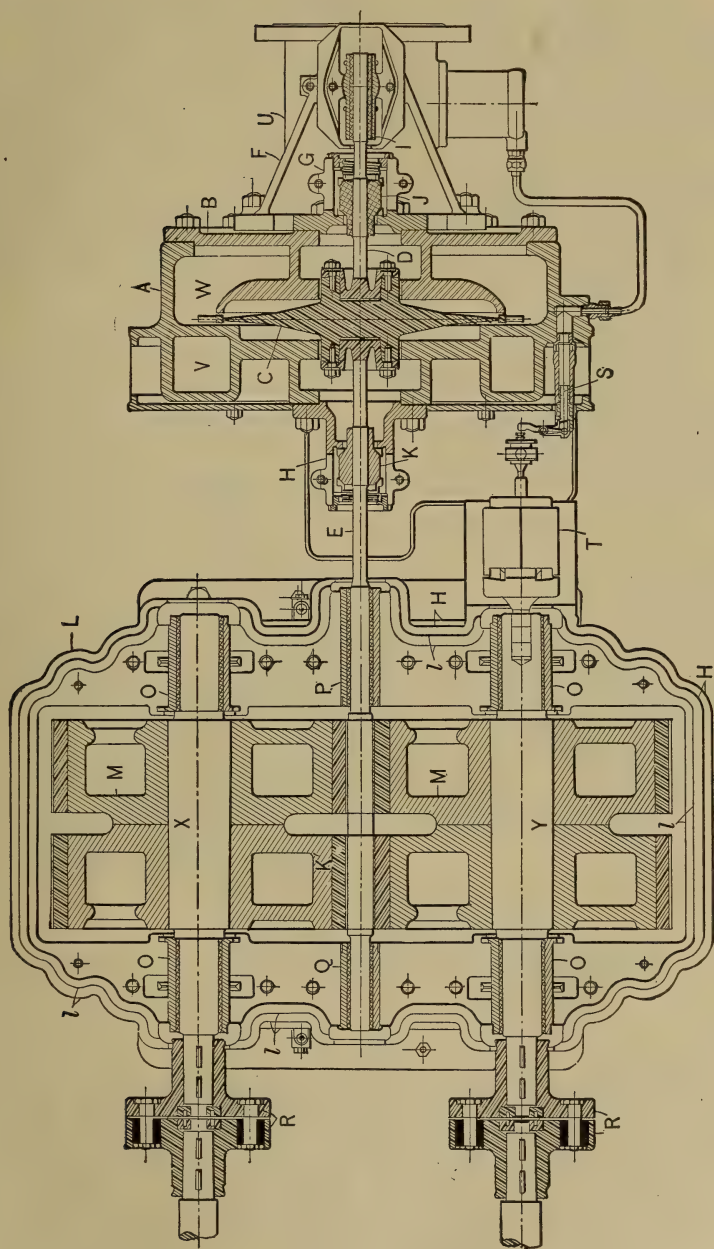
De Laval Turbine, Double Gear, Single Stage.
